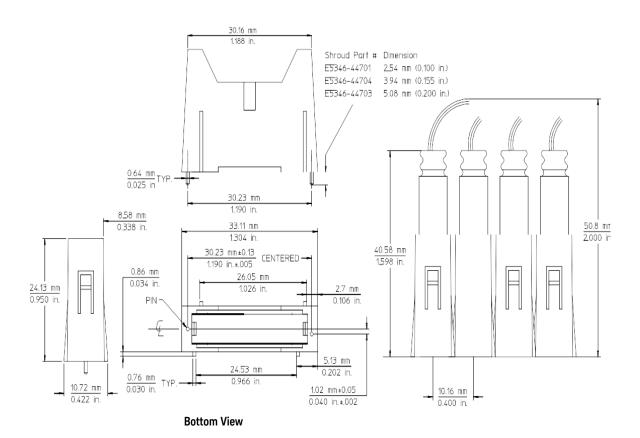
Support shroud dimensions for the MICTOR 38-pin connector
